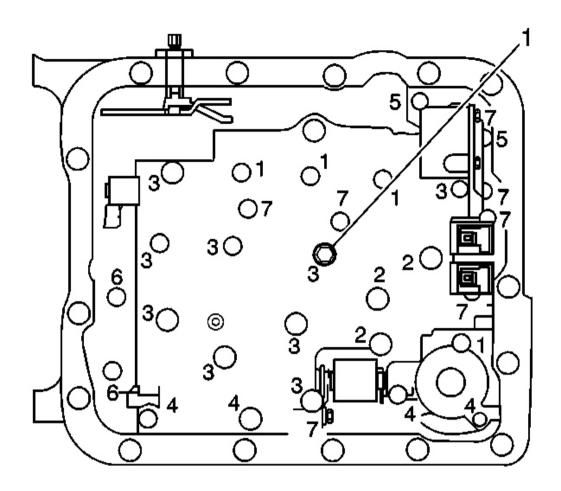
Installing One Bolt Hand Tight In The Center Of The Valve Body Courtesy of GENERAL MOTORS CORP.
